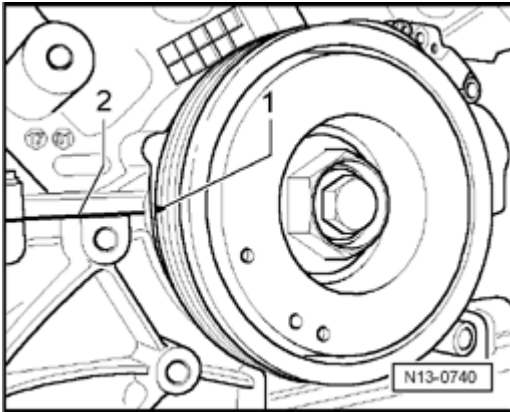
Identifying Marking Aligns With Partition Of Cylinder Block
